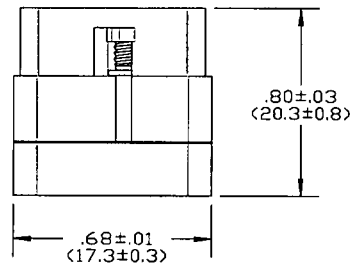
MIL-C-39029/16-168 Receptacle Assembly
